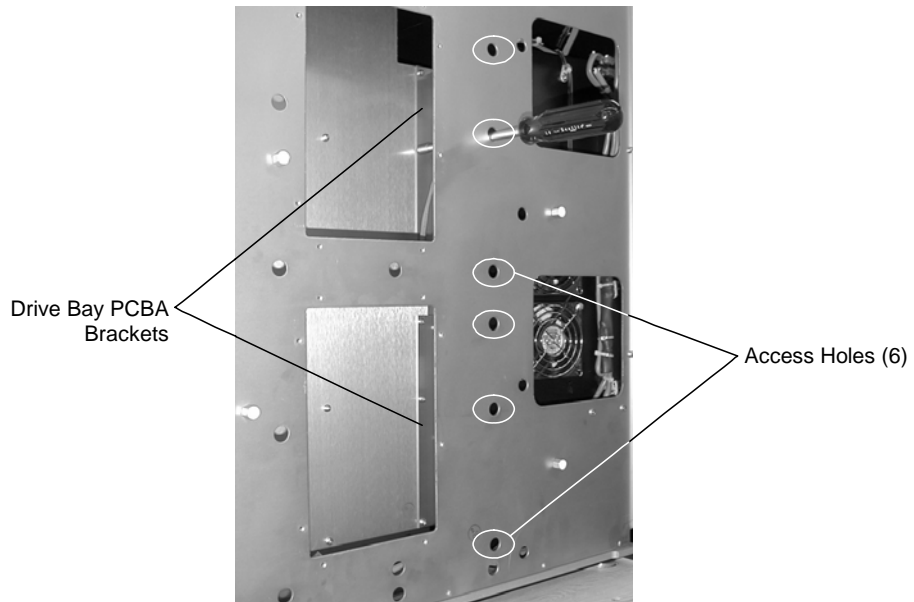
Drive Bay PCBA Brackets and Access Holes - Right Side of TLS
